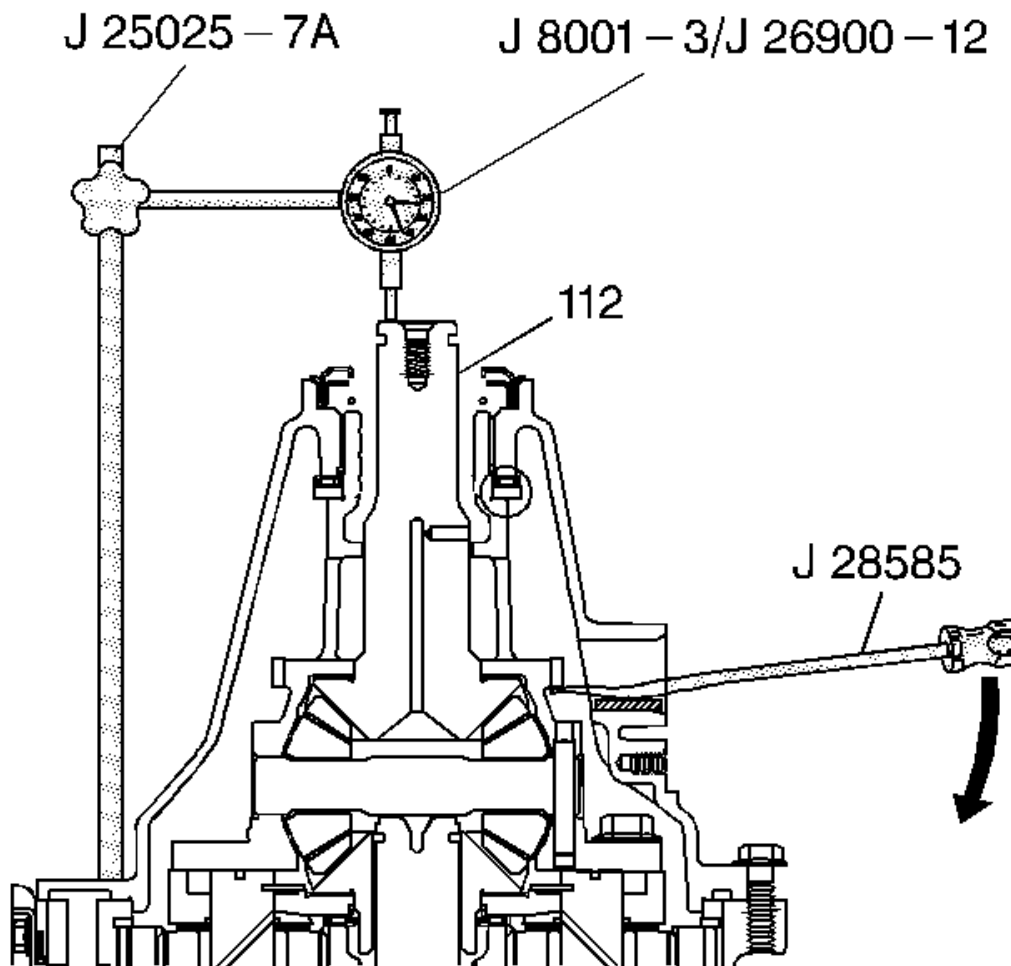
View Of J 25025-7A & J 8001 Measuring End Play Clearance
